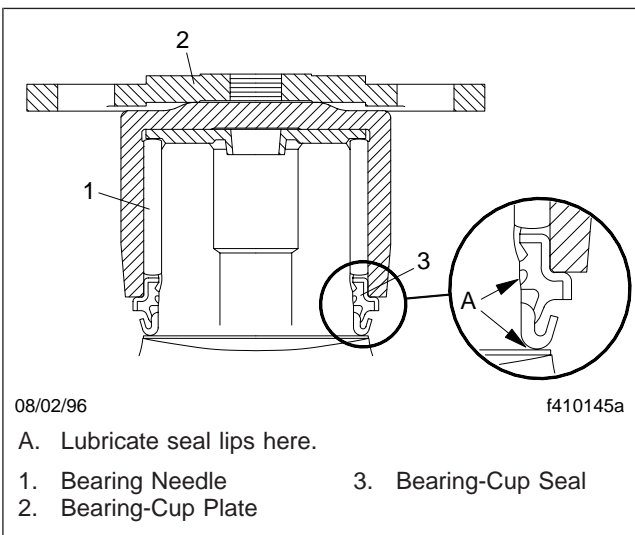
, Sectional View of a Full-Round Yoke U-Joint Bearing Cup
